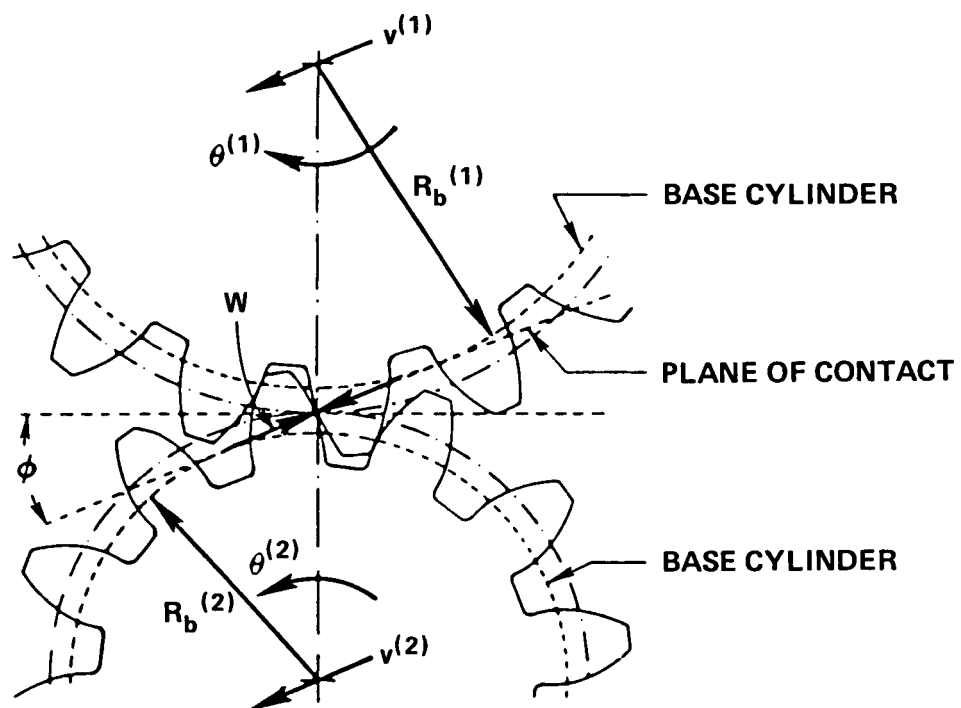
PAIR OF MESHING PARALLEL-AXIS GEARS.
